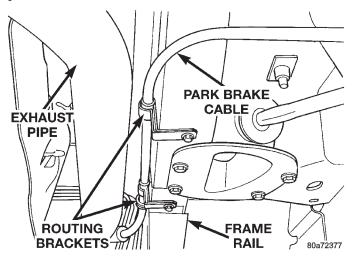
Park Brake Cable Routing Brackets (Right Side)
